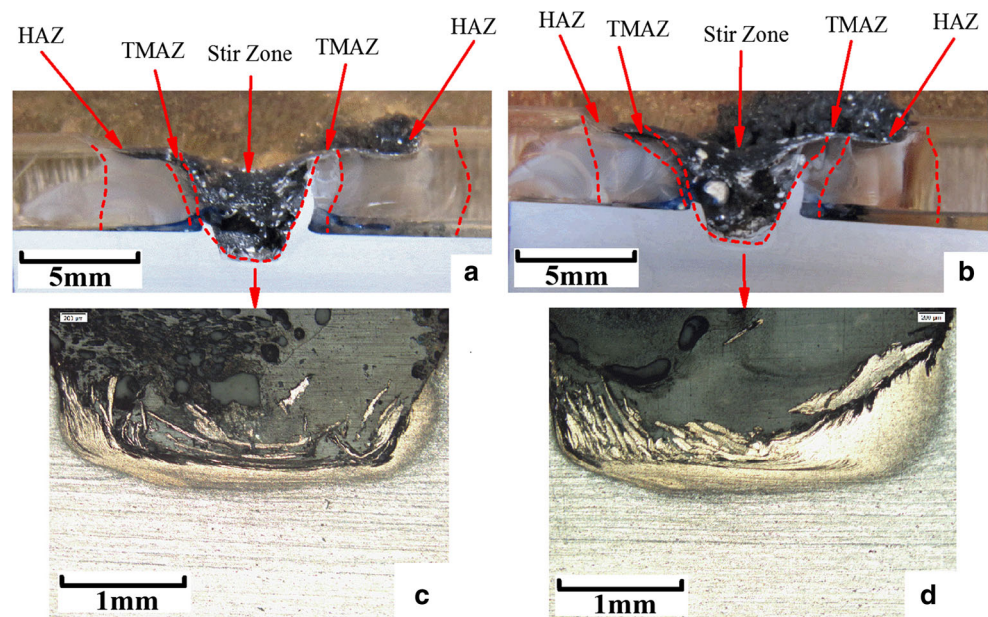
Cross-sectional macrostructures for the PMMA and aluminum sides of welded joints with tool tilt angles of 0° (a, c) and 1° (b, d)
